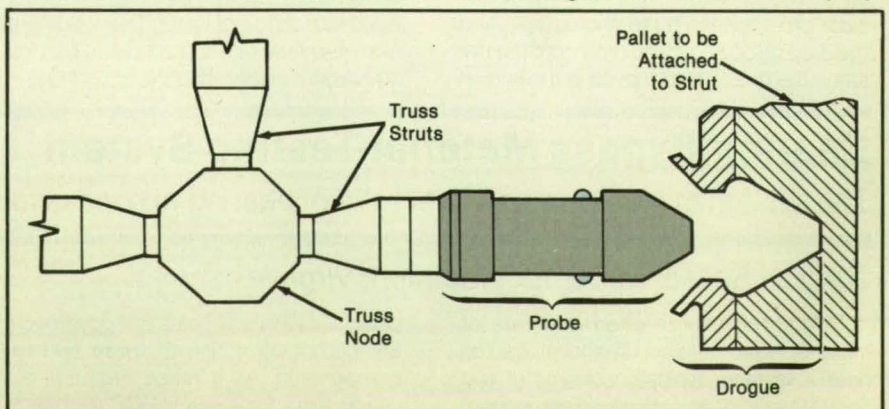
The Probe-and-Drogue Mechanism could be used to attach and detach components of modular structures.
